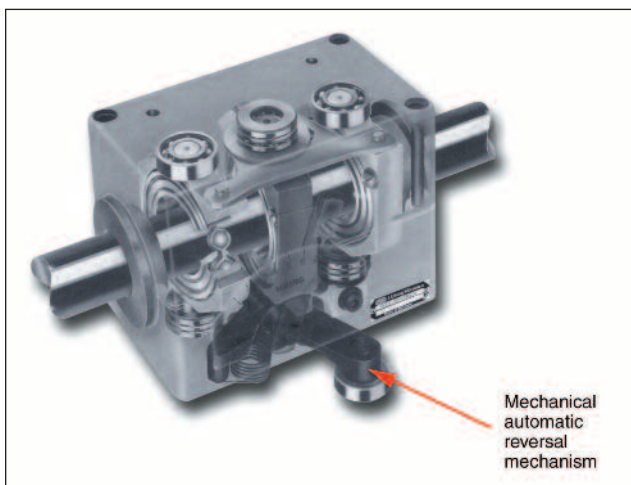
The end stops on the rolling ring traverse assembly frame turn the reversal mechanism which pivots the rolling ring assembly situated inside the housing. When the ring assembly is pivoted to its mirror position on the drive shaft, the linear drive traversing direction is reversed.
